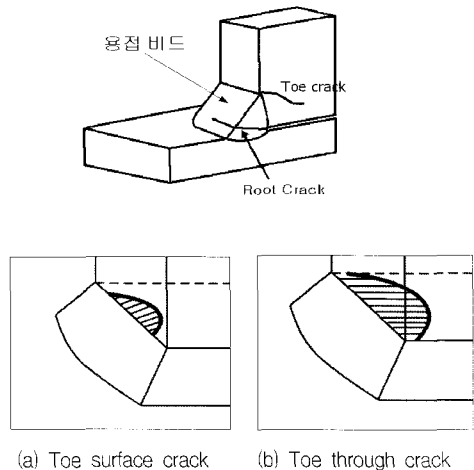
Crack propagation types at boxing fillet welding bead
